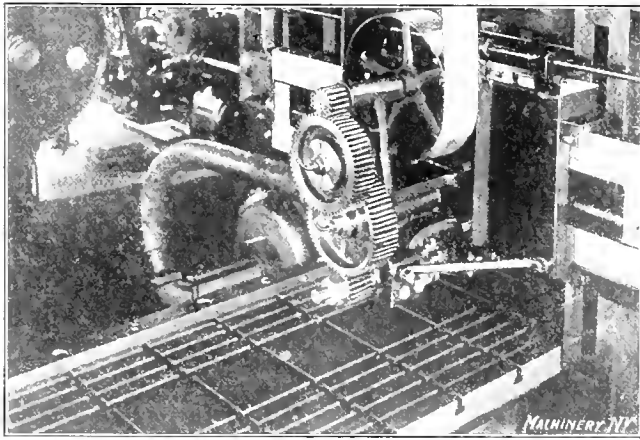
Rack Milling Machine with Individual Chip Exhaust Fan
